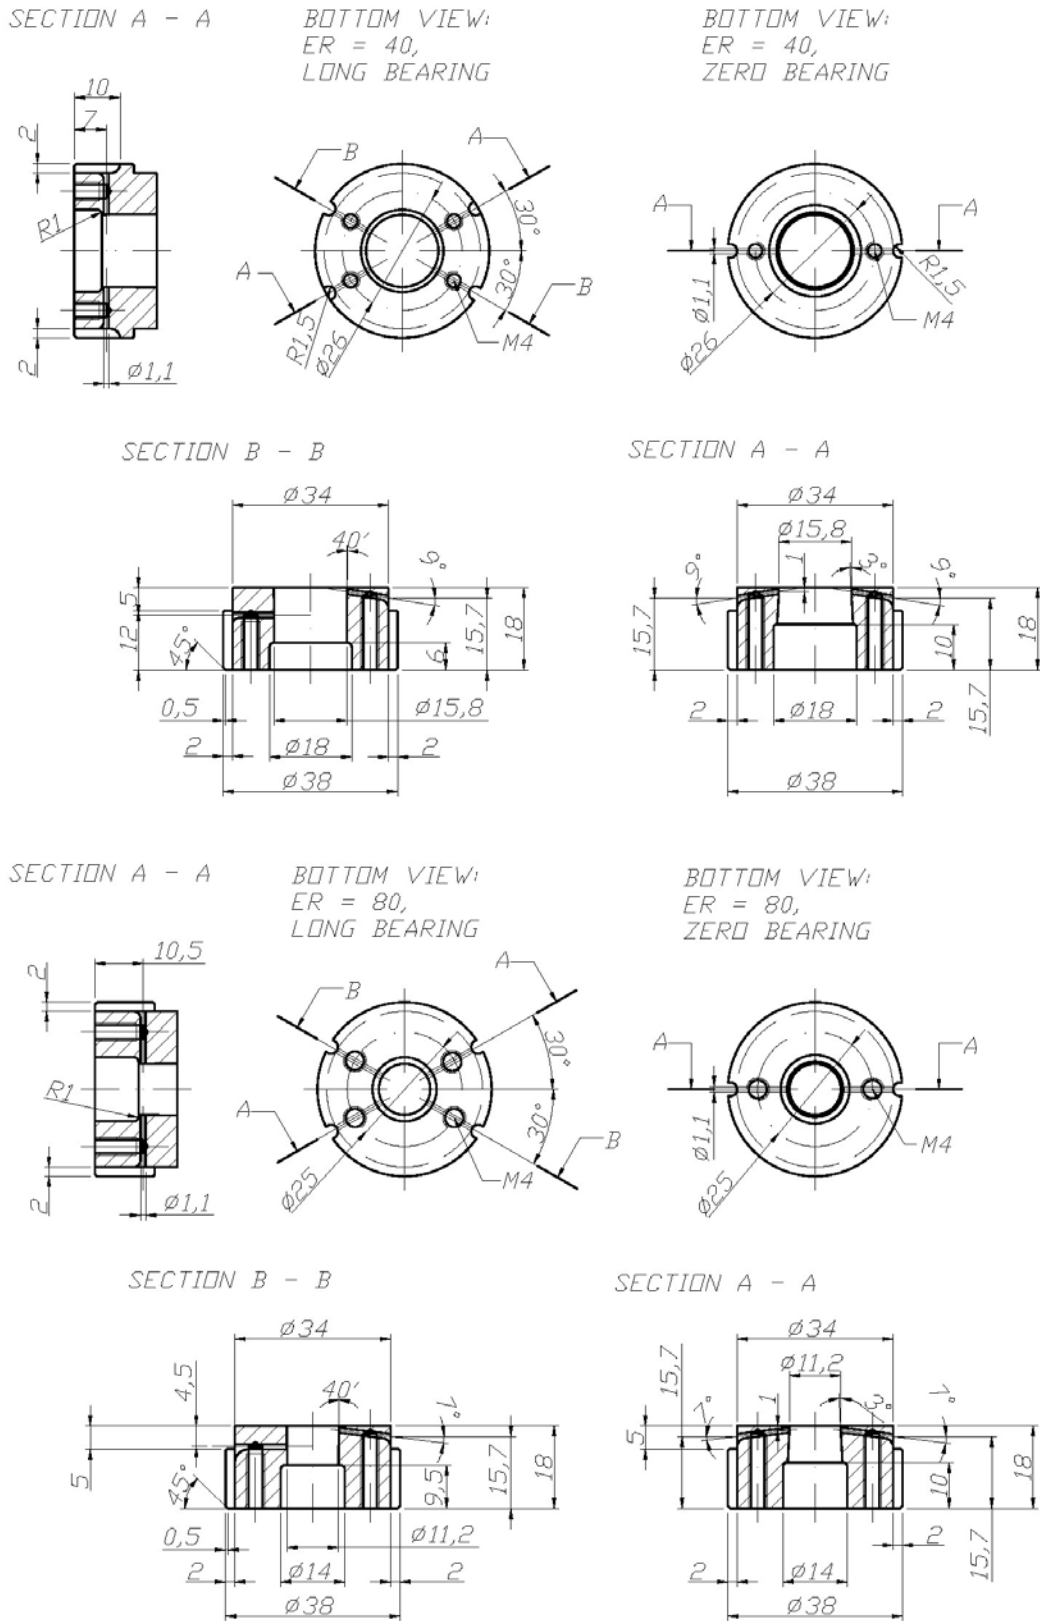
The die outlet inserts: Right – zero bearing inserts, Left – long bearing inserts, Top – extrusion ratio 40, Bottom – extrusion ratio 80.
